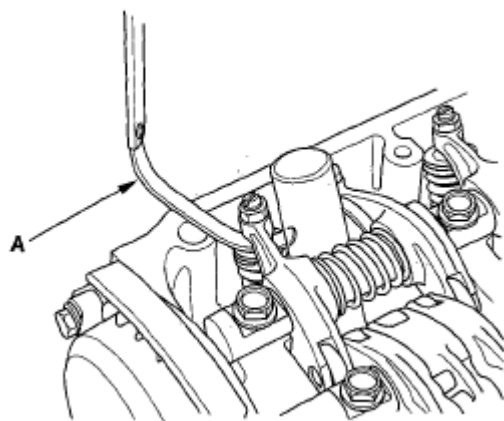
Identifying Feeler Gauge Between Adjusting Screw And End Of Valve Stem
